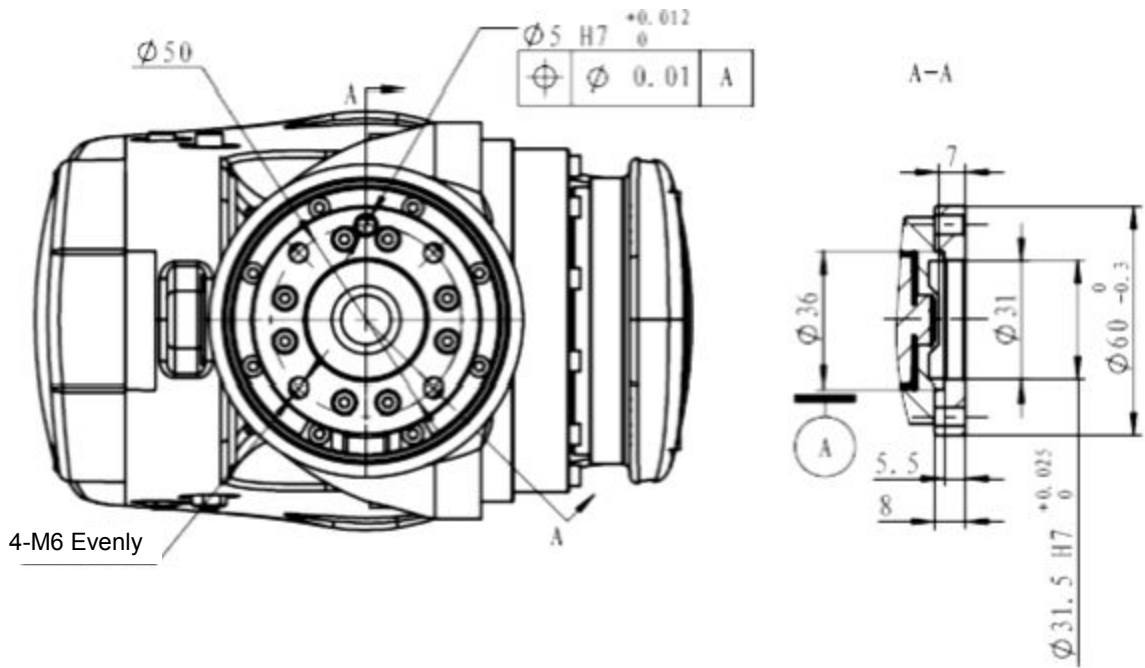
SR18L8 Tool Flange Installation Dimensions
